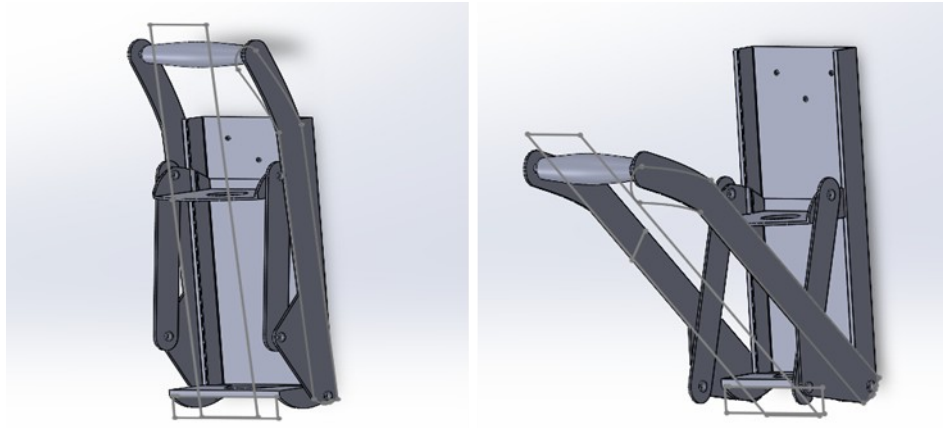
Engineering Drawing of the Bottle and Can Press Tool
